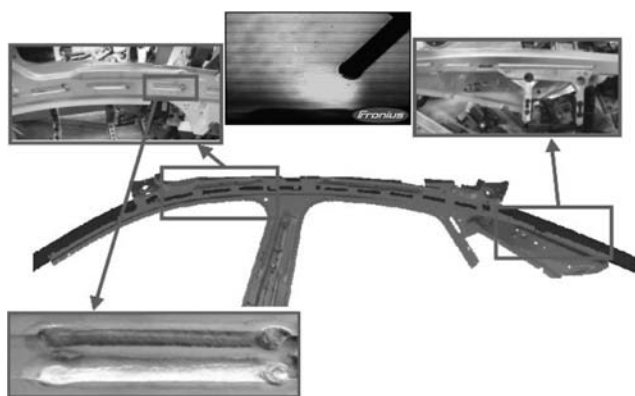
Laser-MIG hybrid welding of car roof structure
